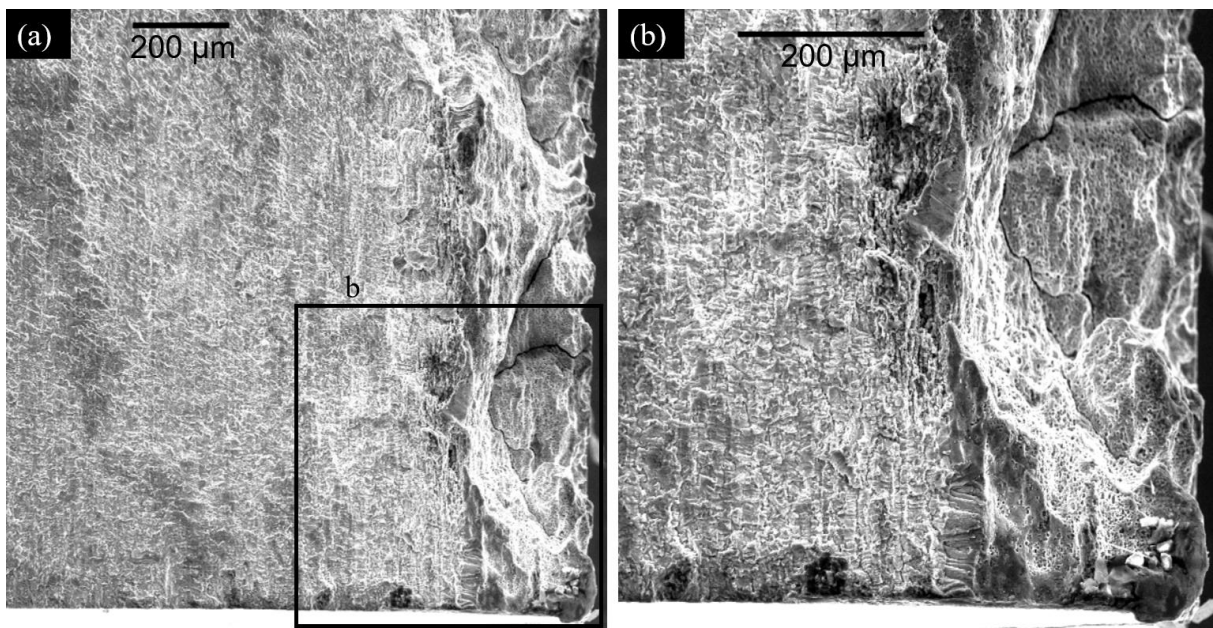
Fracture surface of glass bead blasted specimen with 24 h pre-corrosion.
